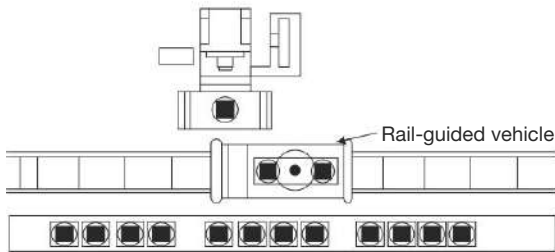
Machining centres for use in FMS with a pallet pool
